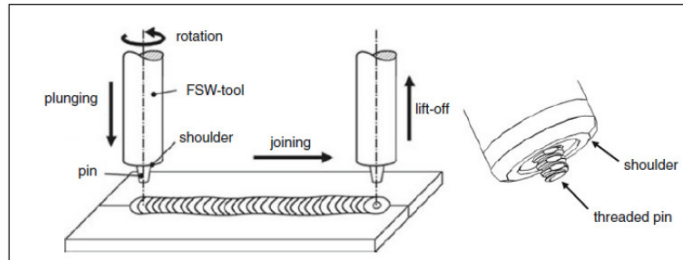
Friction stir welding process and tool details by M.F.Zaeh and P. Gebhard⁷
